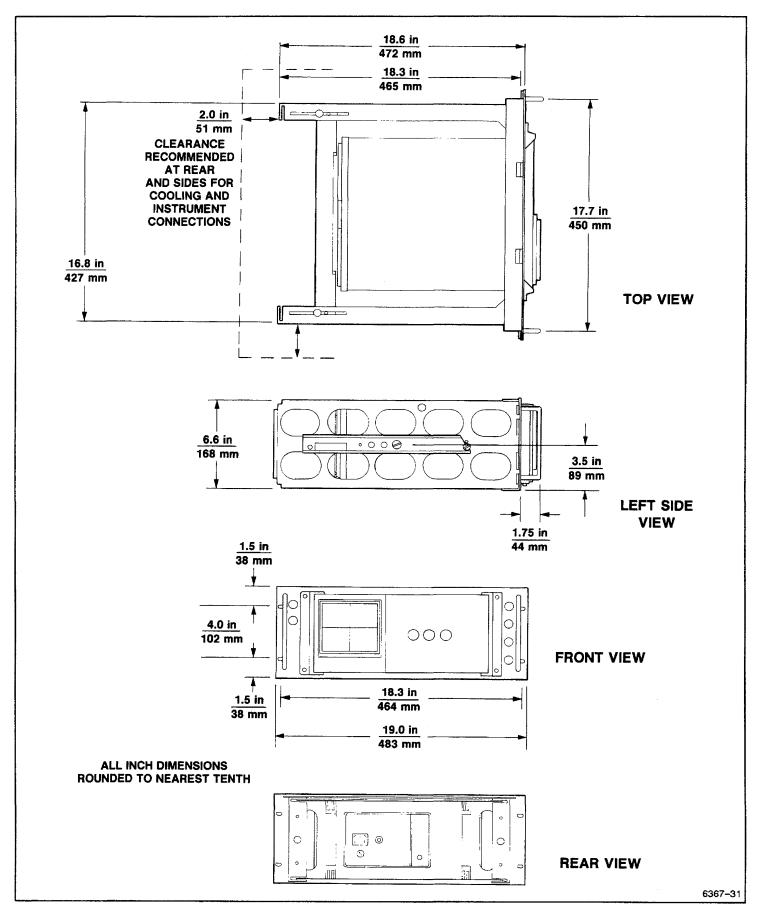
Dimensional outline drawing, rackmount cabinet.
